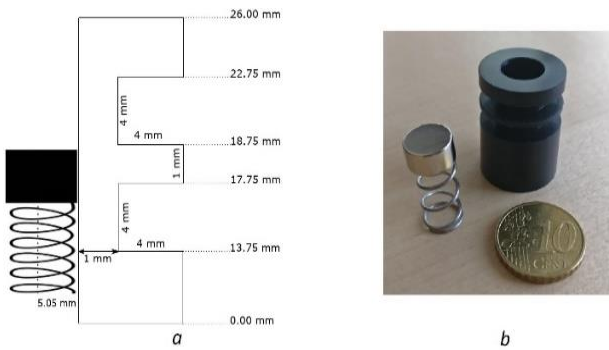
The dimensions(a) and the housing with the magnet and the spring(b) of the single-spring design. The coin is included to illustrate the dimensions.
